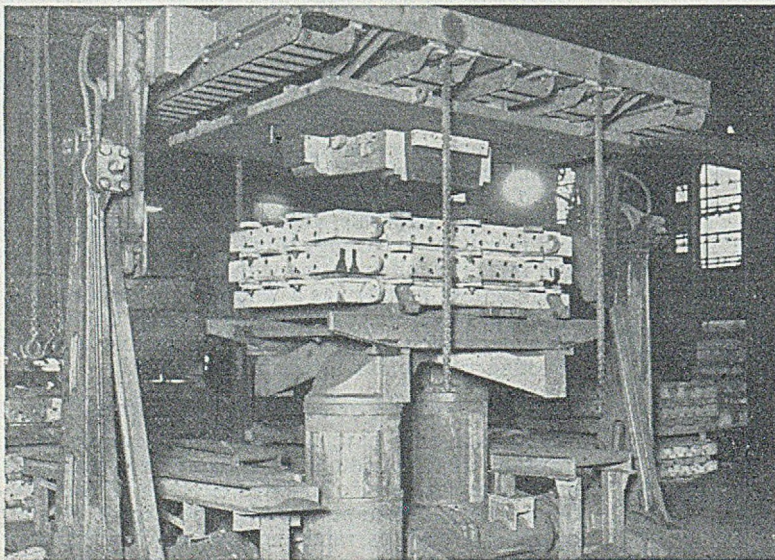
Roll-over Moulding Machine of Large Capacity.
